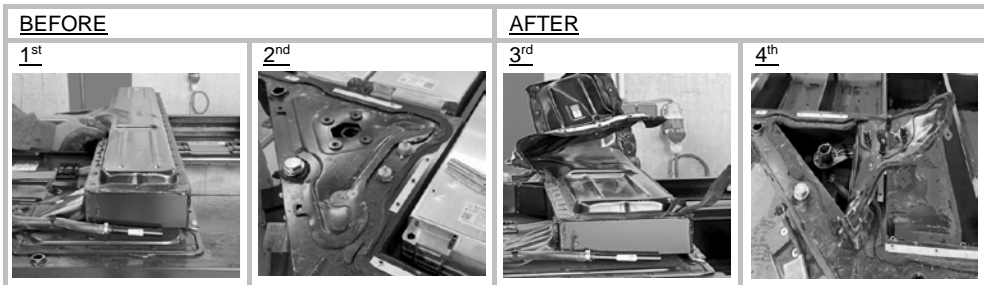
Challenging joining technology: 1st & 2nd: housing cover; 3rd & 4th: cover could only be removed with non-destructive efforts; 3rd: modules in silver visible; 4th: bonding of modules by adhesives visible
